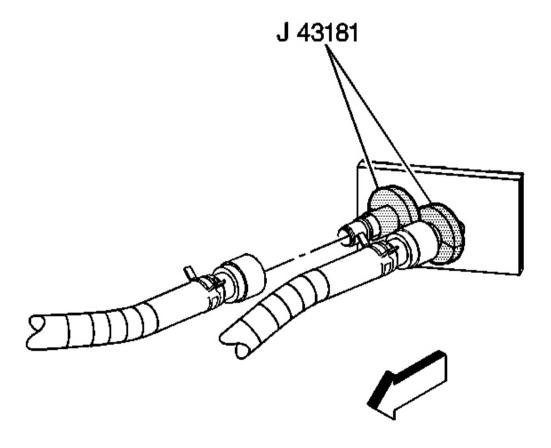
Identifying Heater Hose To Heater Core Outlet
